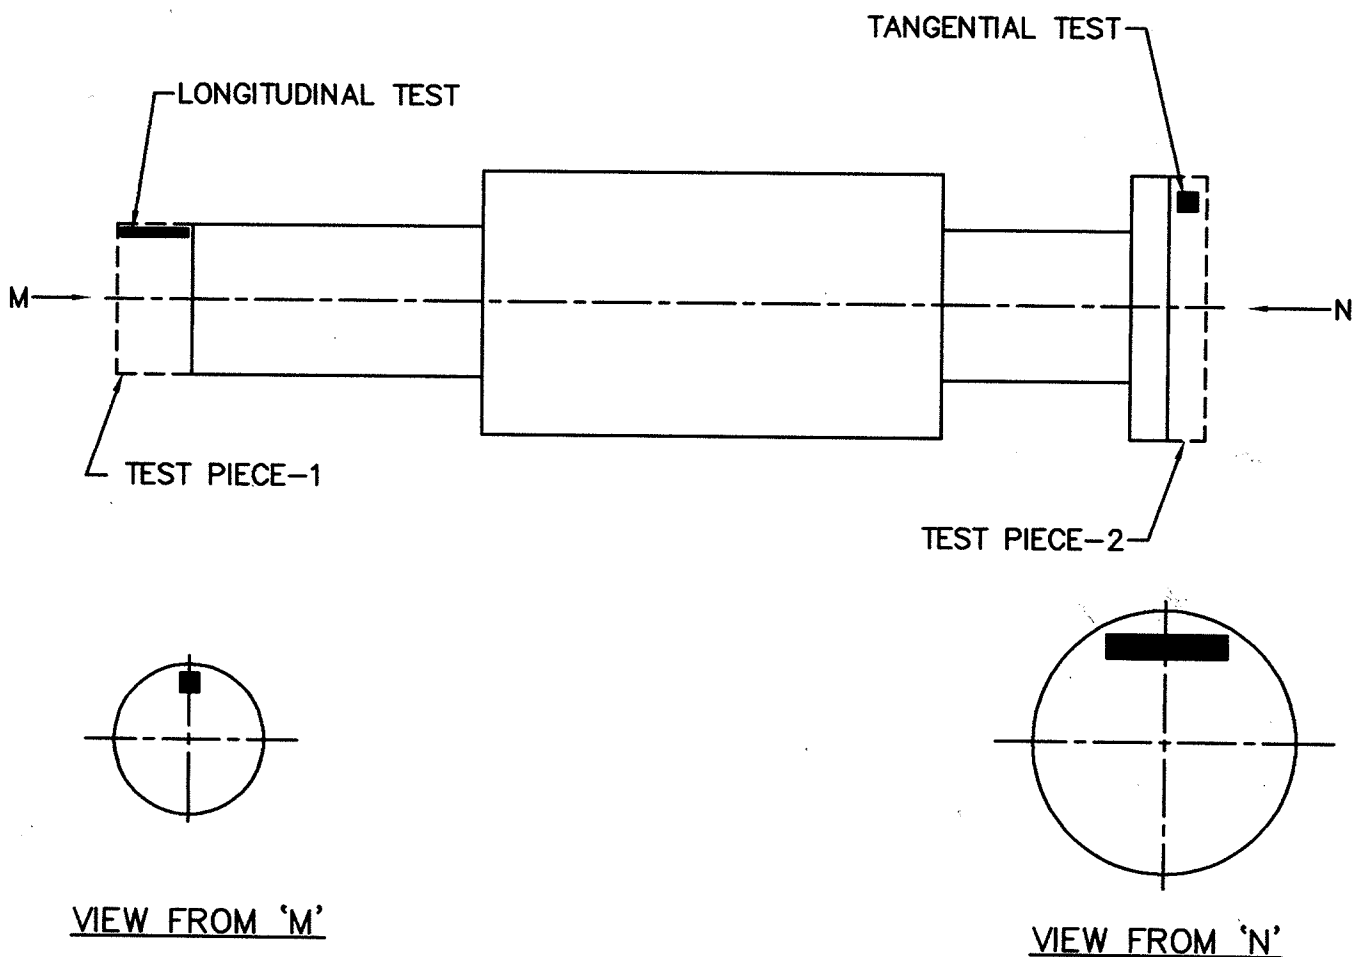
Location of test samples for longitudinal and tangential tests for typical shaft forging.
